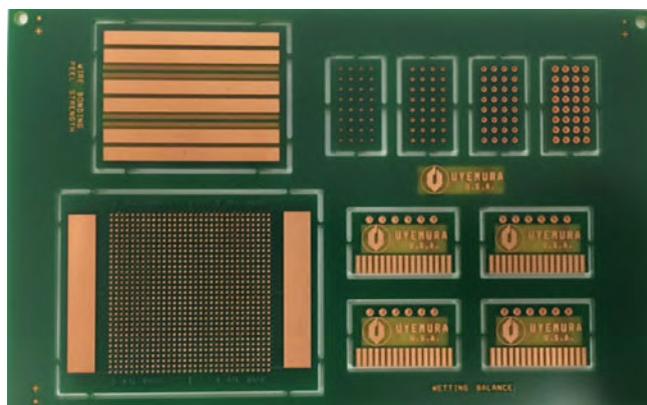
Test board showing wetting balance coupons, BGA array and wire bond array.
